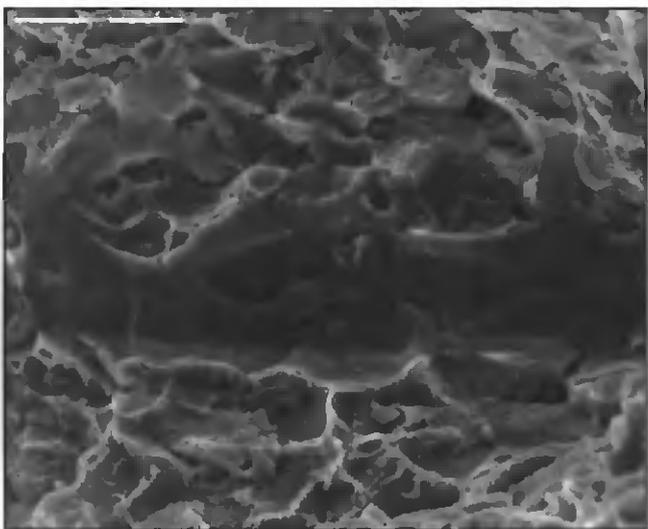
Fracture surface showing a kissing bond in a transverse weld in AA6082 (at higher magnification). The kissing bond is in the plane of the picture.
